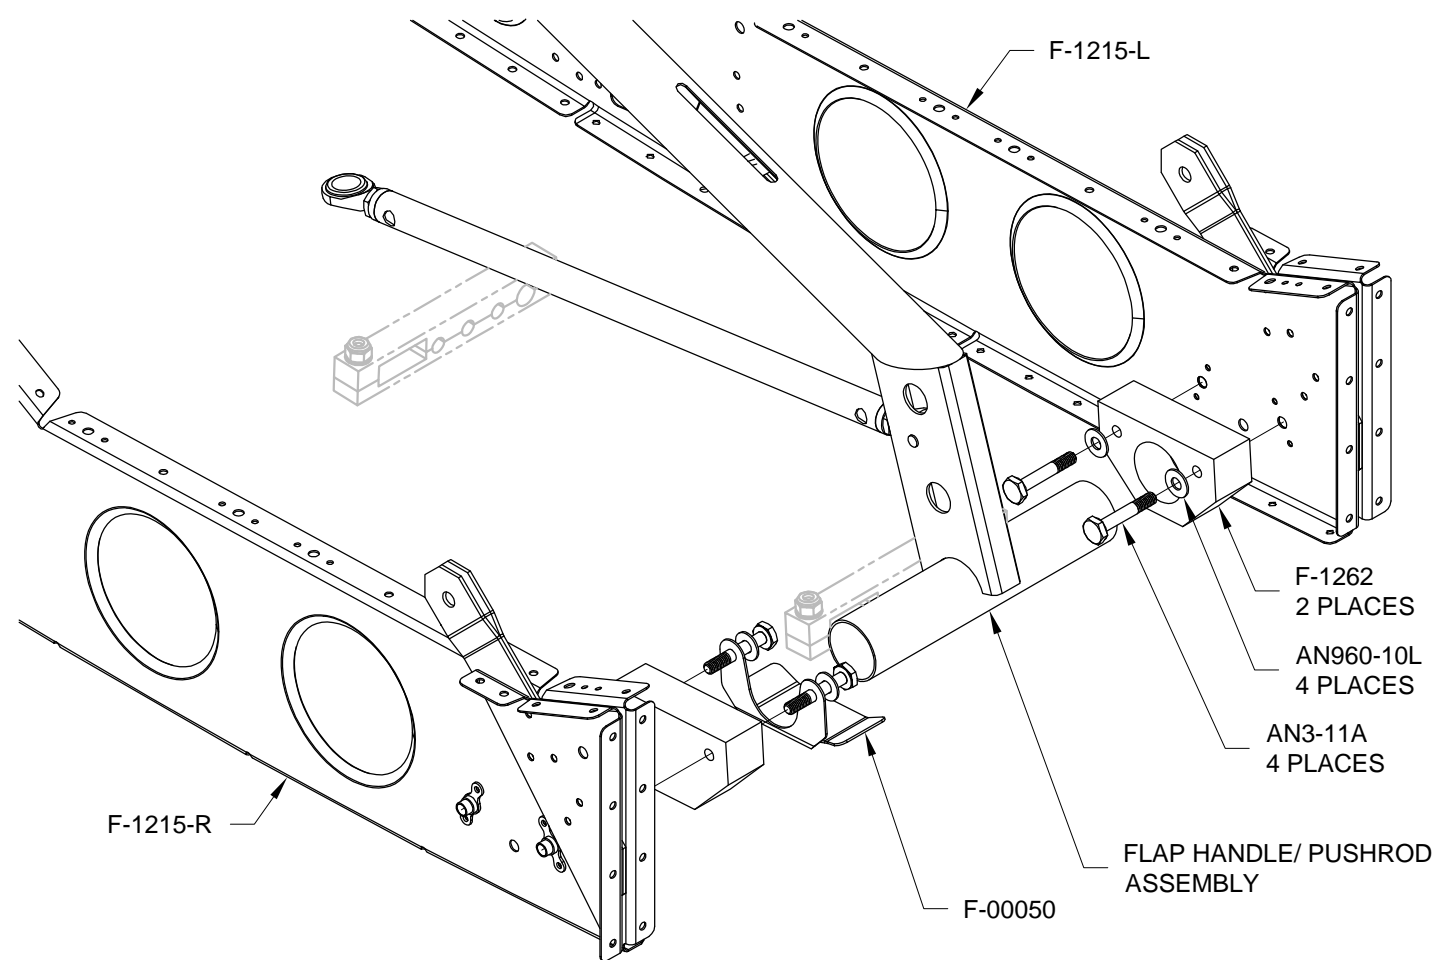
INSTALLING THE FLAP HANDLE/ PUSHROD ASSEMBLY
